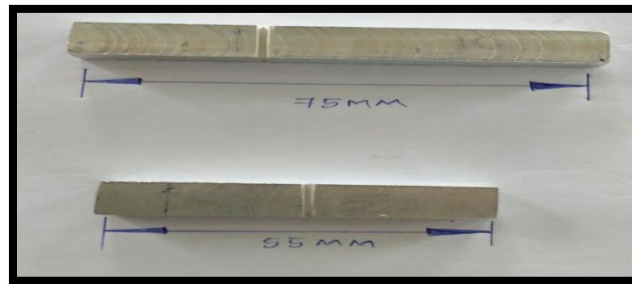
Impact test Specimens of AA7075-SiC and TiC composites before fracture
